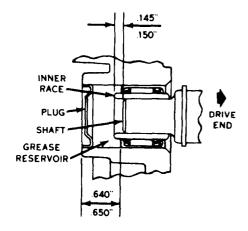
D-20. Bearing Assembled Between Shaft and Housing
